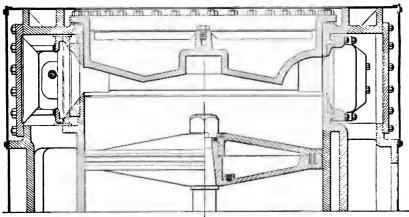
Axial Section of Cylinder in Fig. 264.
